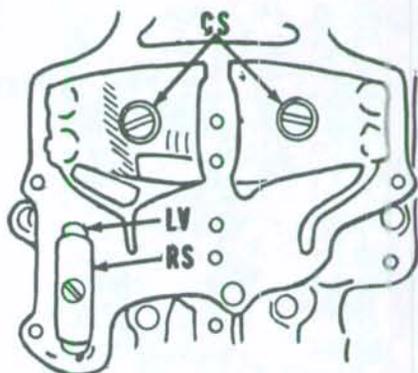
View of crankcase with intake manifold removed. The reed-type crankcase bleeder valve (LV) and stop (RS) can be removed for service, with manifold off. The two center main bearing screws (CS) must be removed before crankcase can be disassembled.
